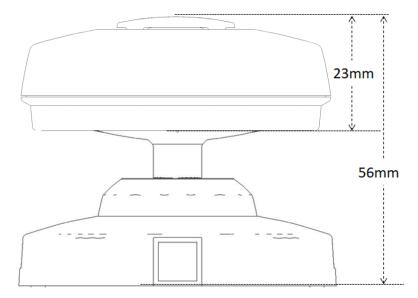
Modbus CO2 Sensor Dimension - Side View- Swivel Mount
